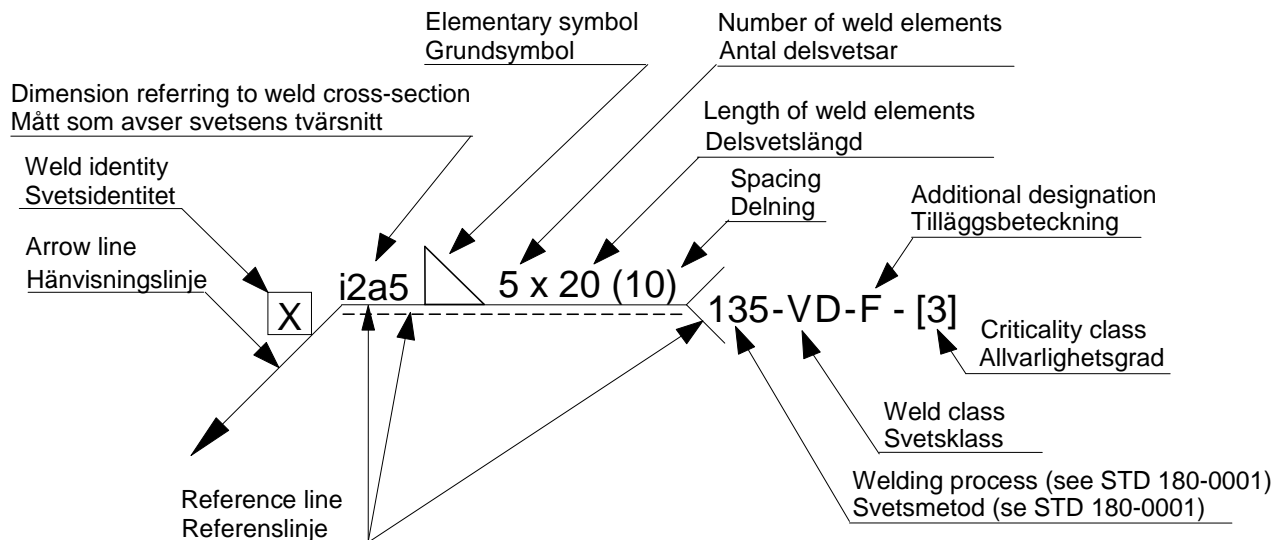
Symbolic representation of weld / Svetsbeteckning
